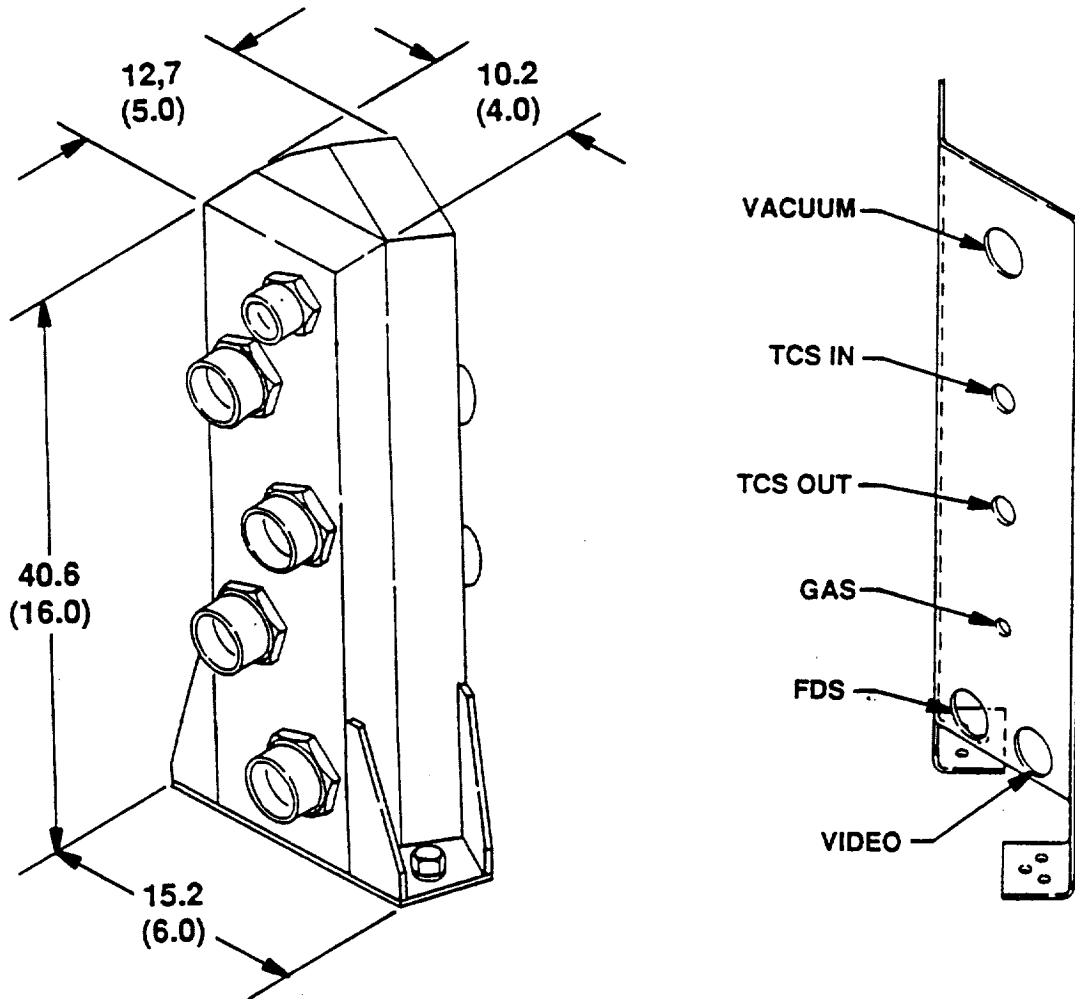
EXPERIMENT RACK-1 PANEL LAYOUTS
